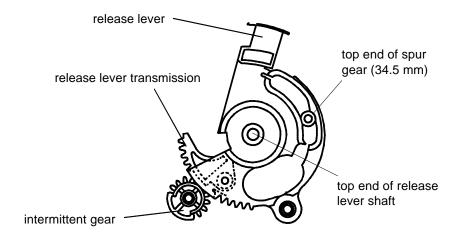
Engaging the Right Frame Assembly Gears (2 of 2)
